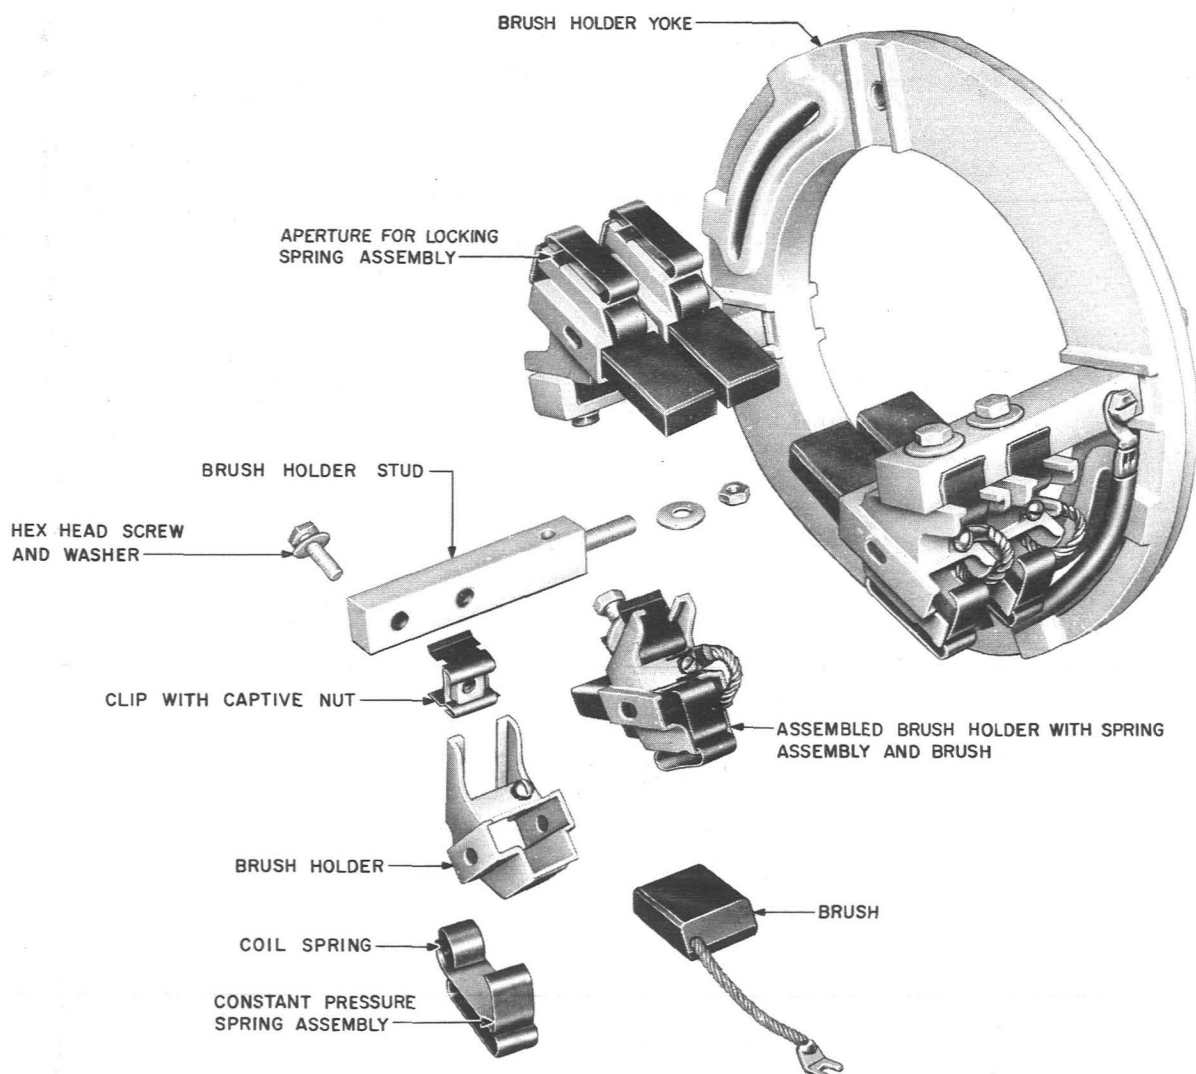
Yoke, Stud, and Brush Holder Assembly
